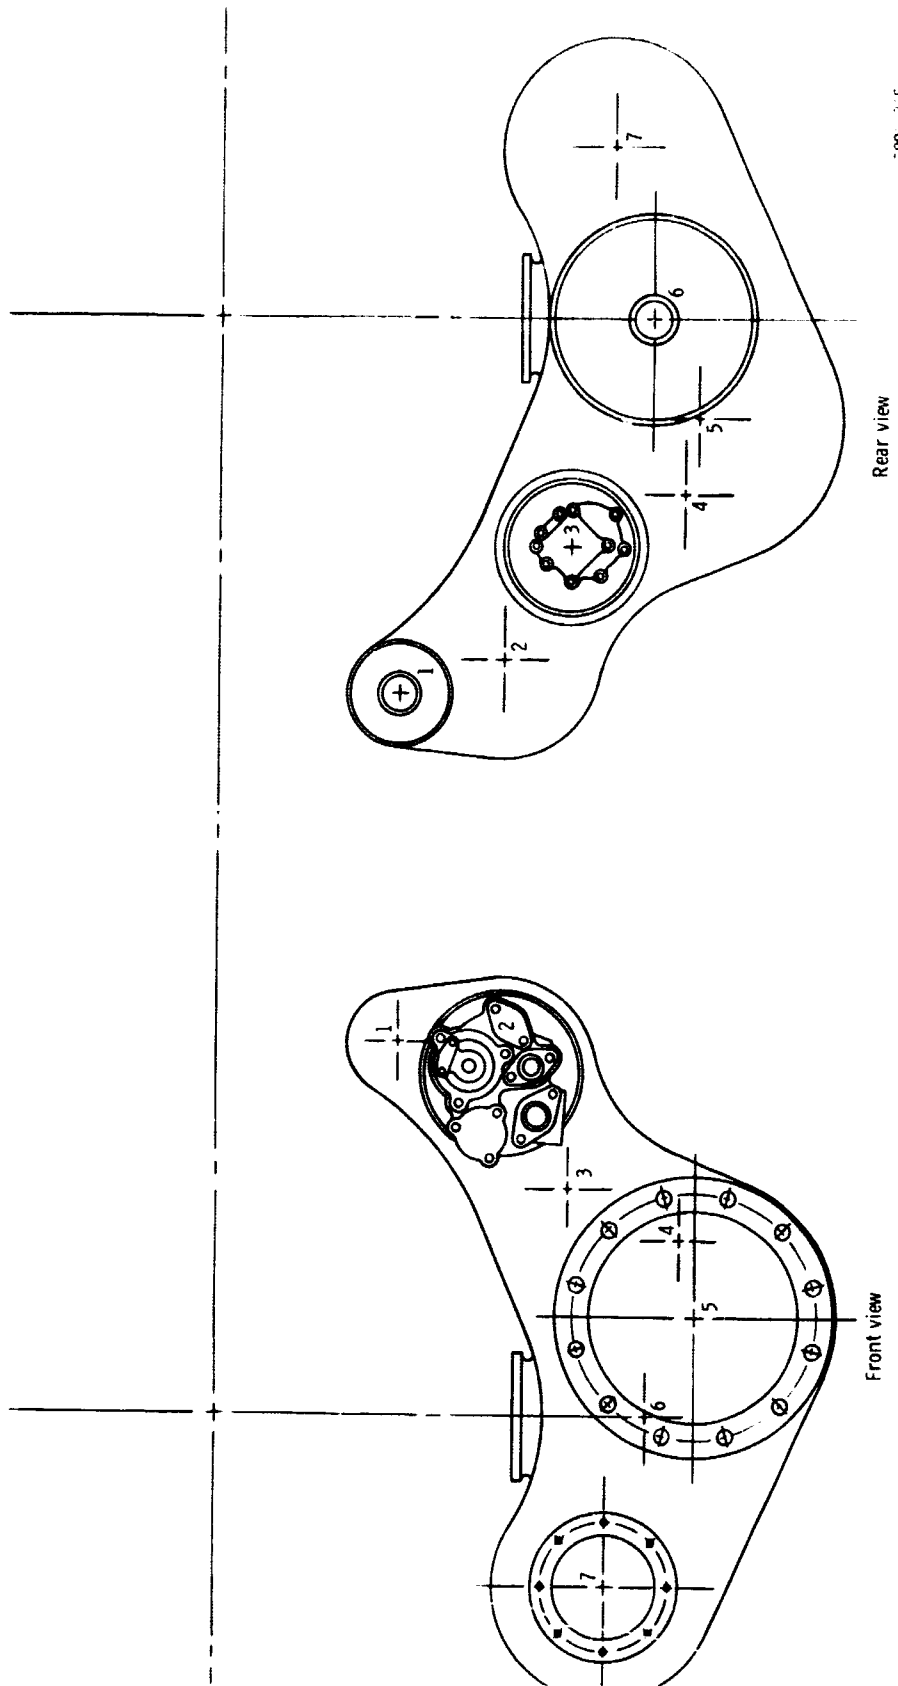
6-1. Front and rear plan view of PD218-Q gear train and accessory drives.
